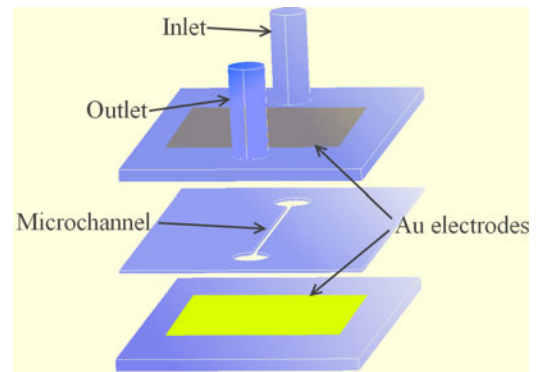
Sensing device exploded drawing. Microchannel dimensions are $25 \times 0.4 \times 0.25 \text{ mm}$.
